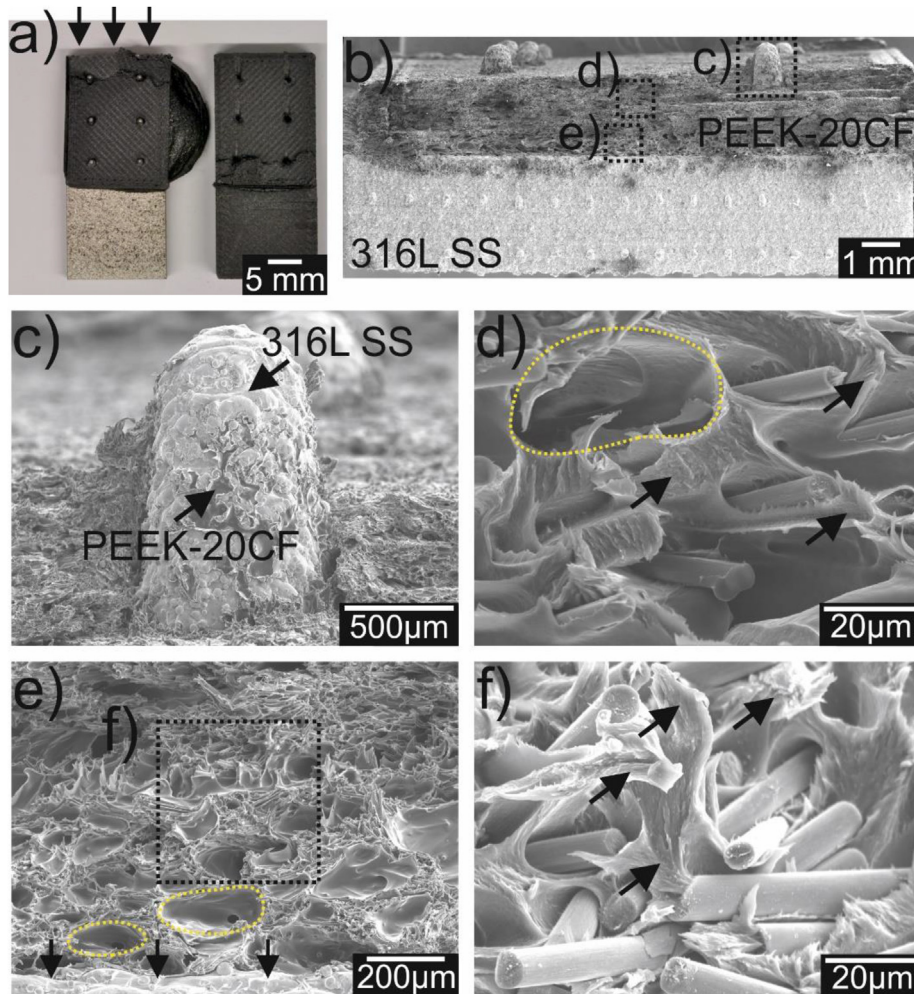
a) Fractured U-Joint after quasi-static lap shear test; b) SEM overview of the fractured surface; c) – f) show detailed views of selected regions.
